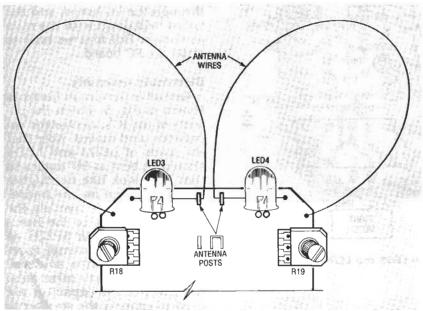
THE FEELER WIRES are installed as shown here. The feeler posts are soldered to the board over the feelers, with the straight part of each feeler centered under the post.
